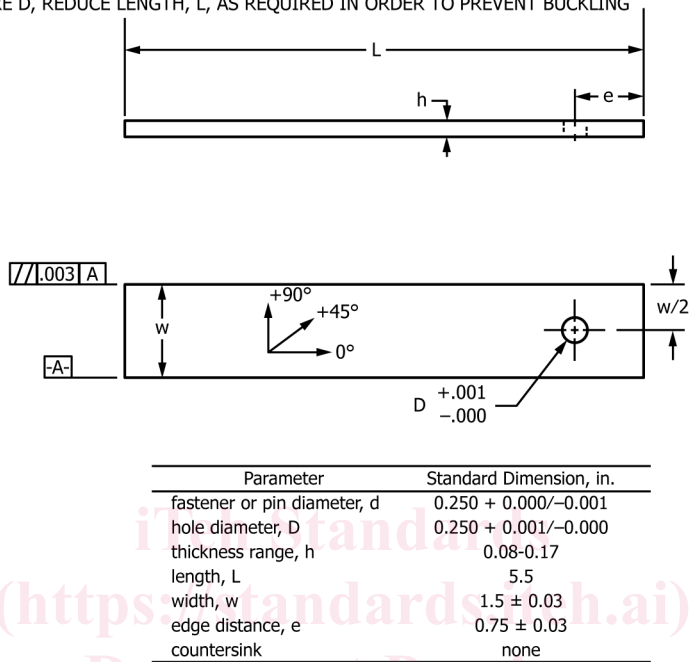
Double-Shear and One-Piece Single-Shear Test Specimen Drawing (Inch-Pound)
